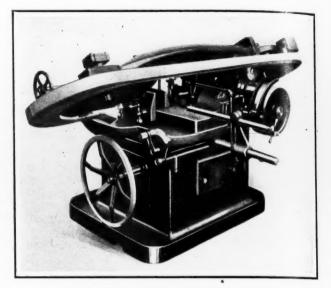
Rear View of Avey Milband Cutting-off Machine
